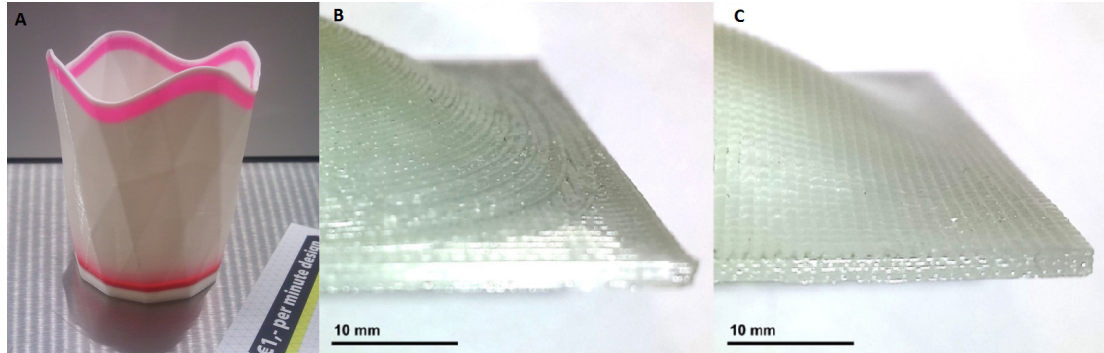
Curved layers printed using 3-axis FFF machines; (A) A vase with a sinusoidal top surface generated by editing the Z values of standard gcode [119]. (B) Manufactured using conventional planar layers, (C) has the surface layers printed using Curved Layer FFF (CLFFF), showing an improved surface (B and C adapted from [106]).
